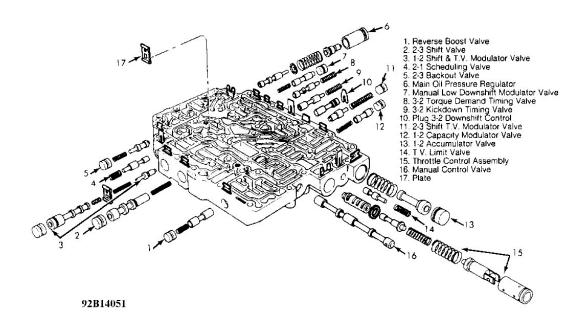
Exploded View of Valve Body & Components Courtesy of FORD MOTOR CO.
